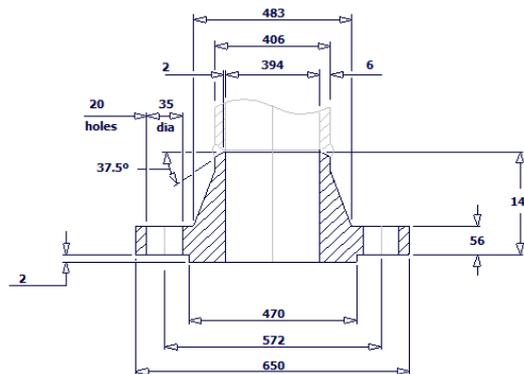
Flange design 16''NB Weld Neck Flange 300# RF Sch-10
